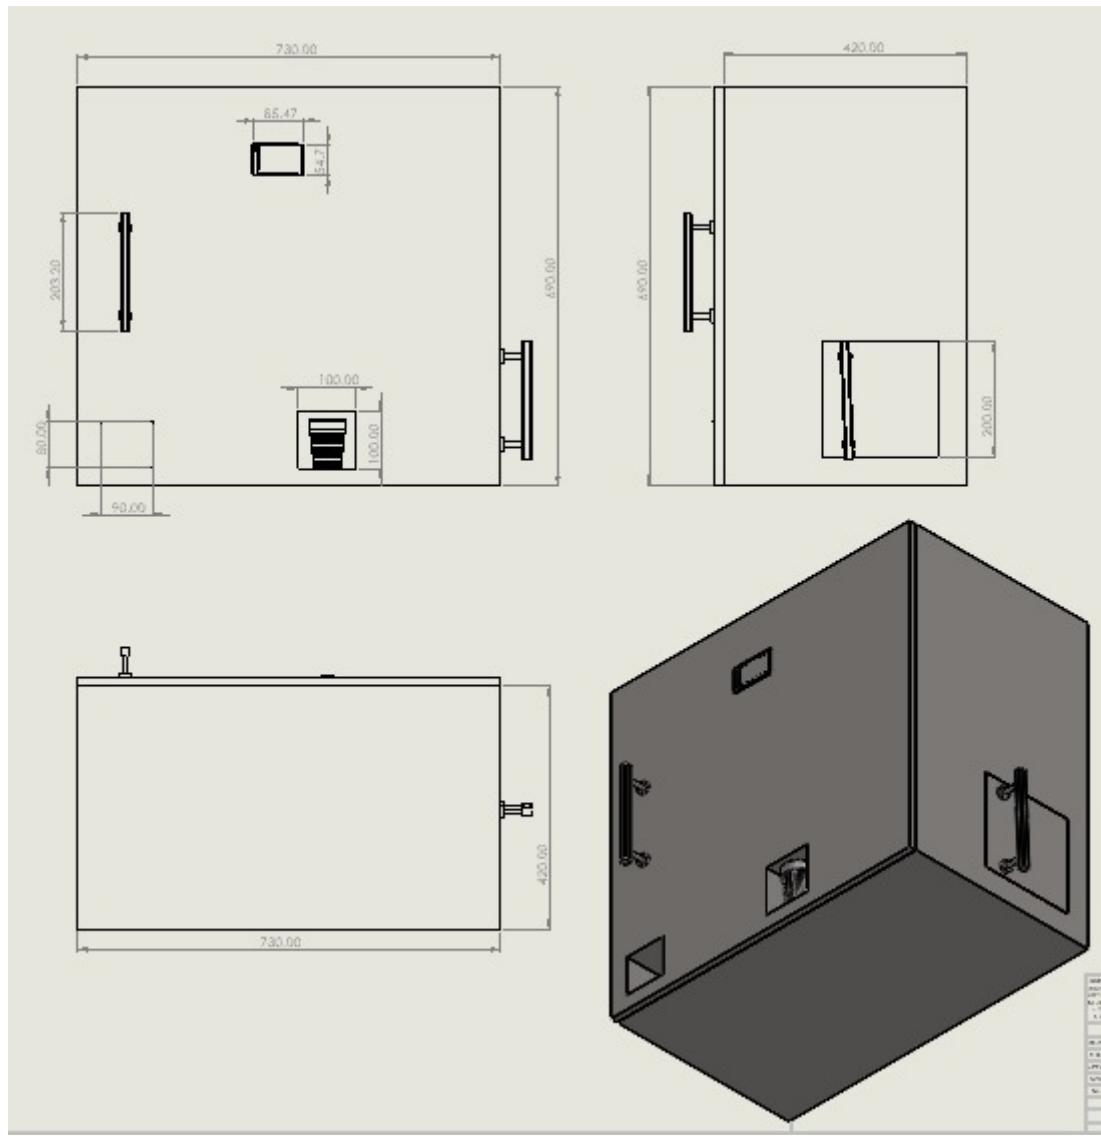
Machine Cover Assembly Made Using SolidWorks 2022
